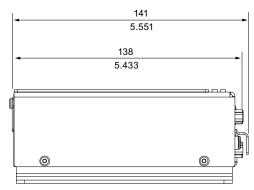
Dimensional drawing of the device with mounting brackets Side view
